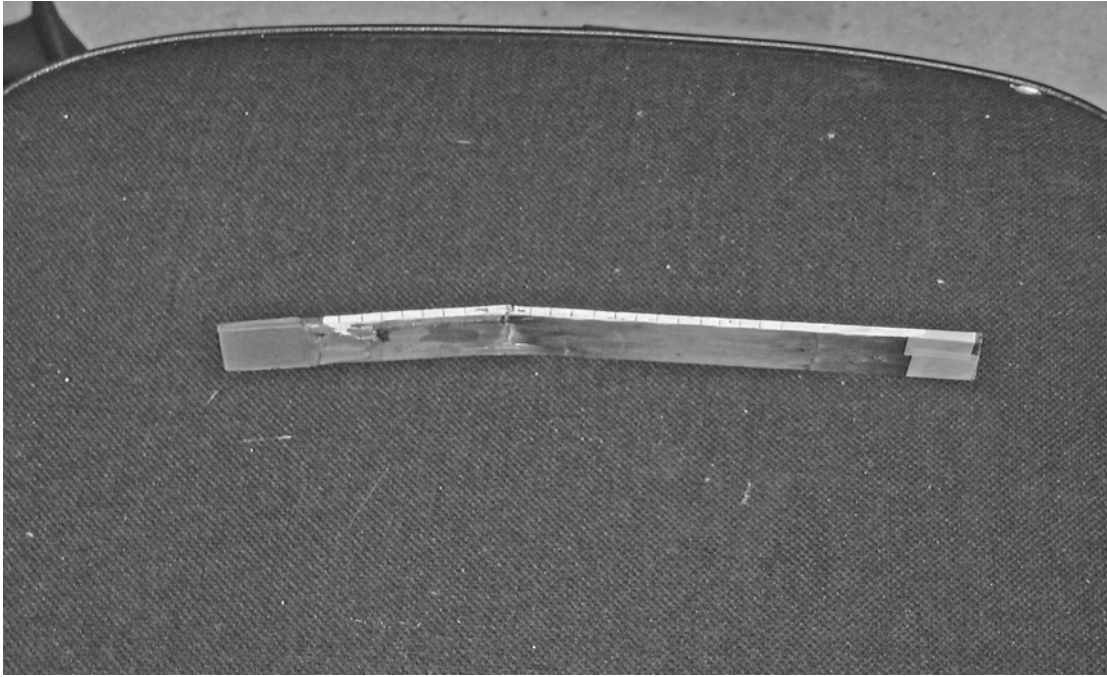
Unexpected Fracture of Z-pinned ENF Specimen
